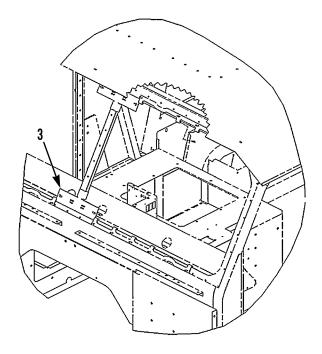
Front Suspension Bumper and Muffler Mounts (Sheet 2 of 2)
